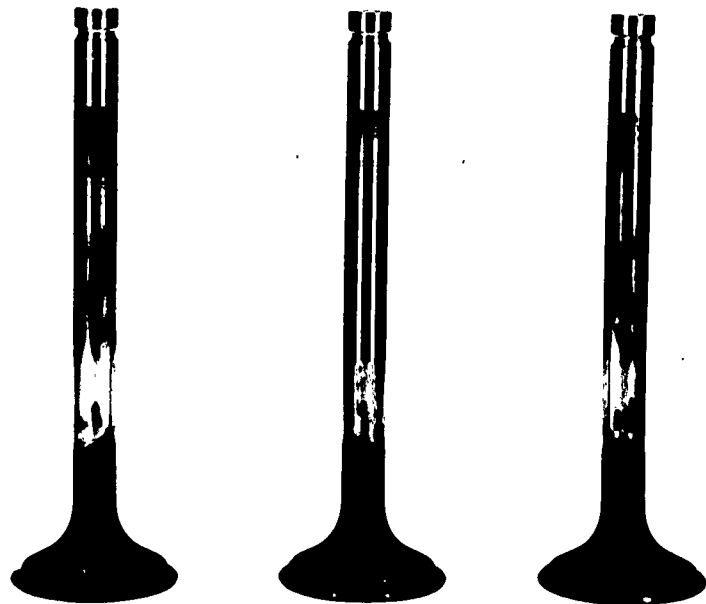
NOS. 6,10 & 11 (EXHAUST) VALVES SHOWING GUIDE DRAGGING MARKS ON STEMS.
